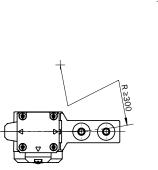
Dimensional drawing for TR110-SRU2Bx1 safety switch (mm)
